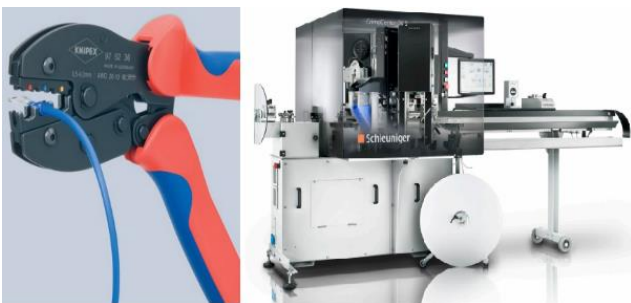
Terminal crimping pliers and terminal crimping machine (Knipex, 2019; Schleuniger1, 2019)
